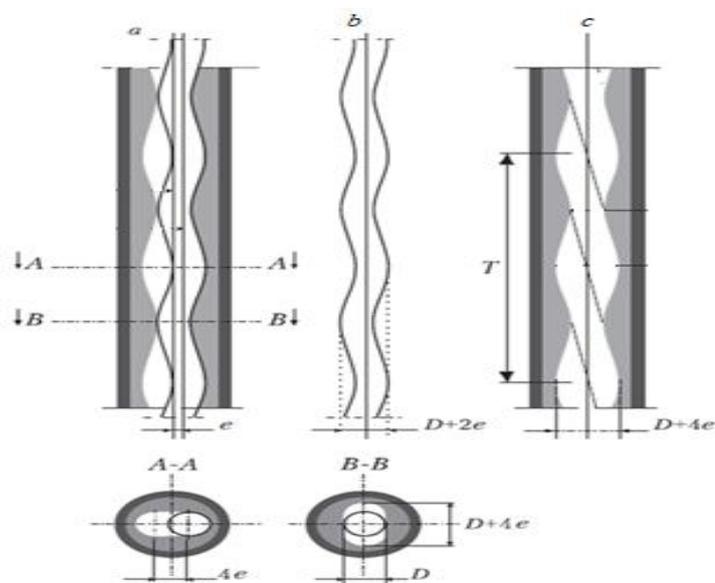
Working bodies of a single-cavity pump (e - eccentricity; D - cross-sectional diameter of the rotor; T - pitch of the stator screw surface): a - screw pair; b - rotor; c – stator [3]
